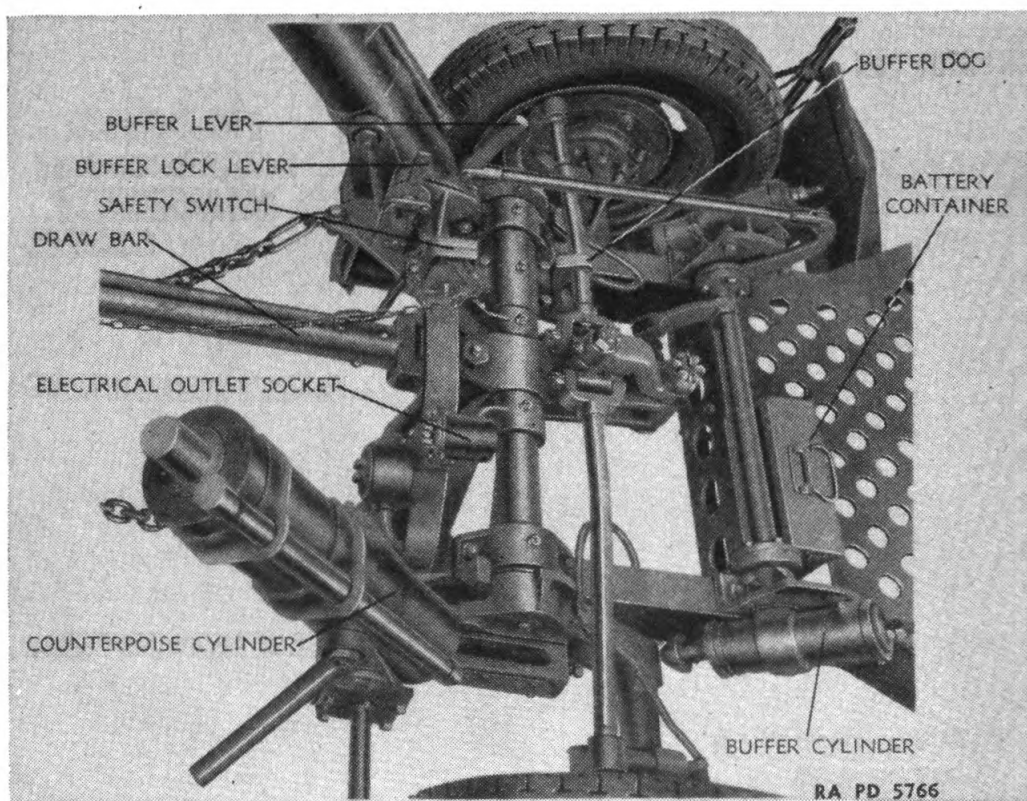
Counterpoise cylinder and buffer mechanism.
